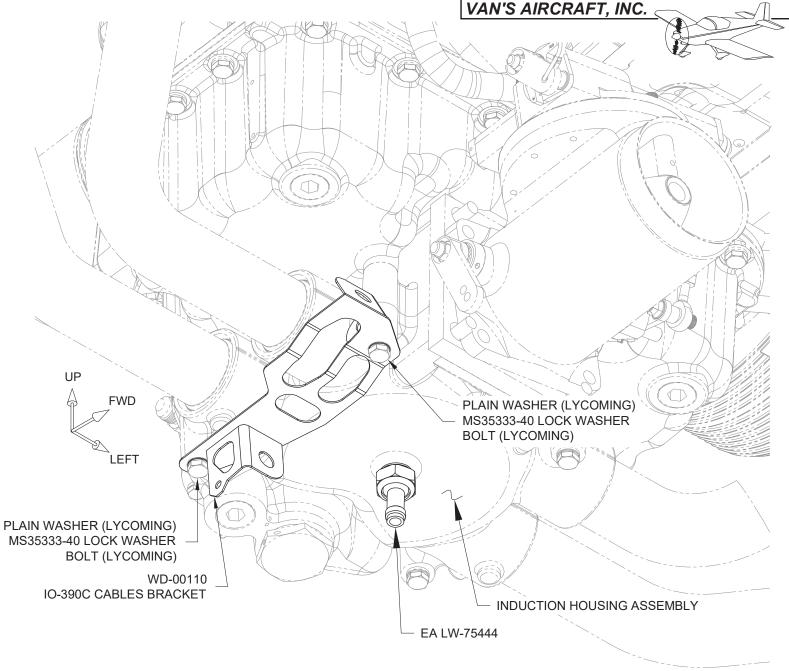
A: SNIFFLE VALVE & WD-00110 INSTALLATION
